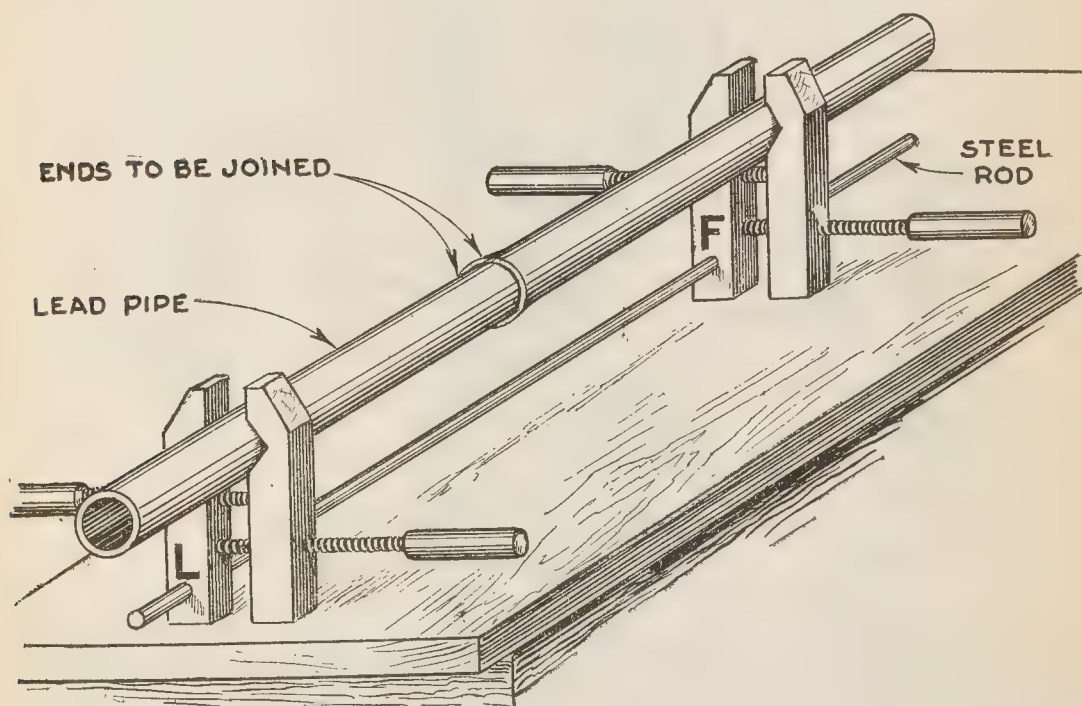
,446—Author's pipe clamps made of two carpenters wooden clamps, having holes L, and F, bored in one leg, accurately fitting a steel rod.
